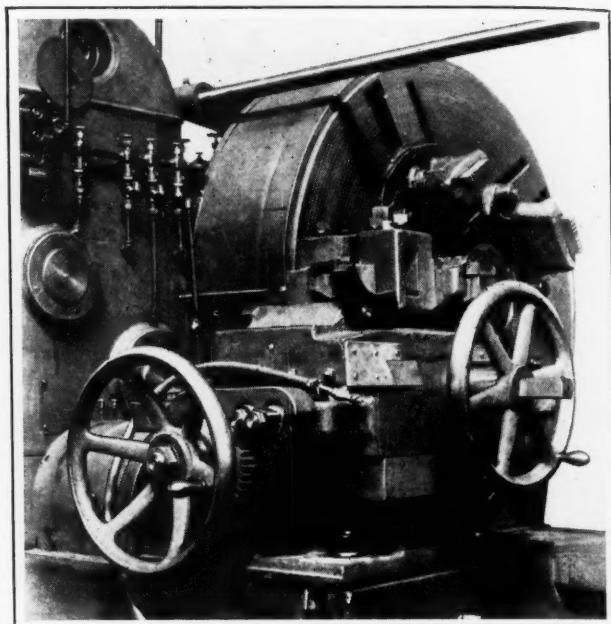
Improvements Made in Niles Car-wheel Lathe
